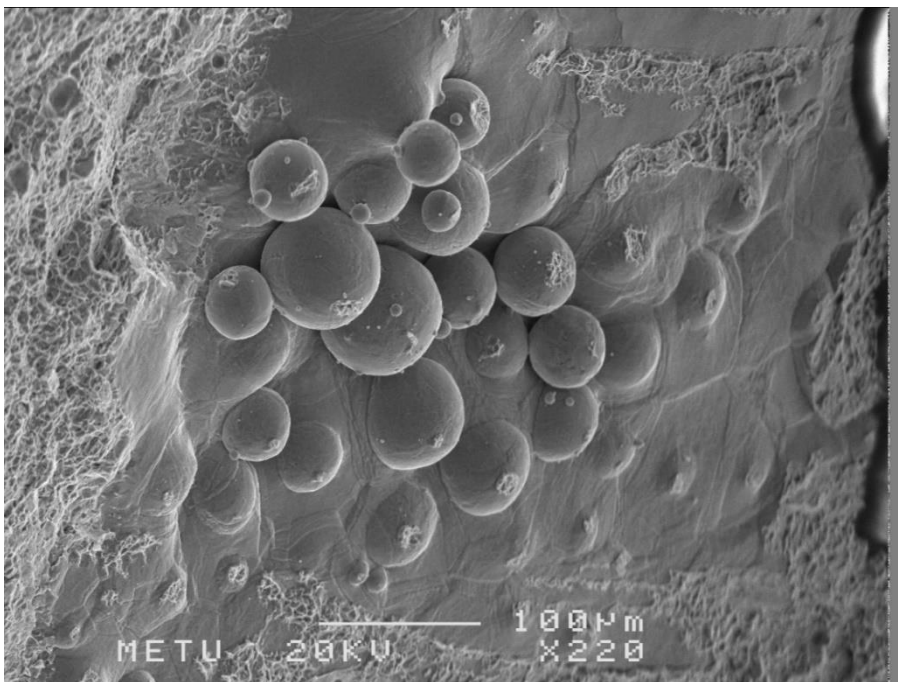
Unmelted powder particles at the edge of the fracture surface of 45⁰ angle built specimen.
